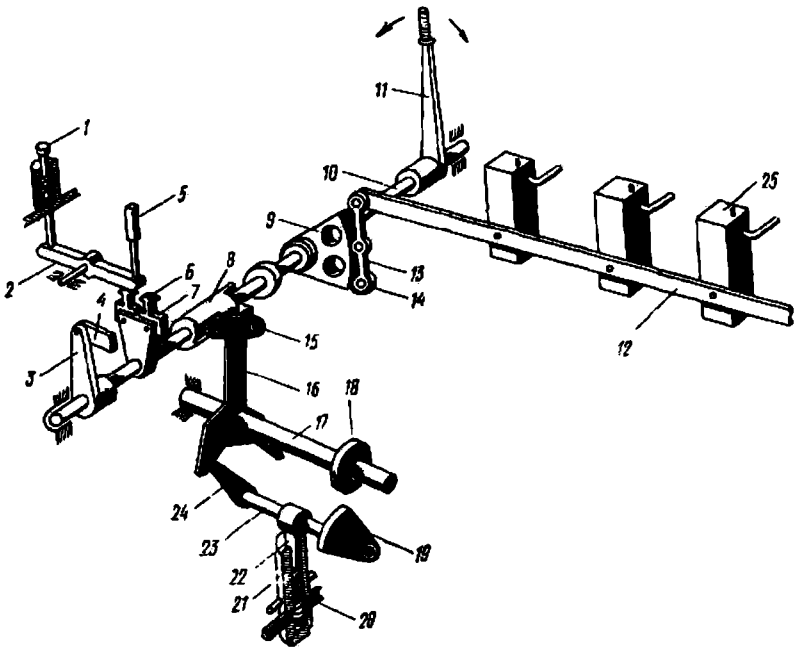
Starting and reversing gear of ДР 30/50 diesel engine
